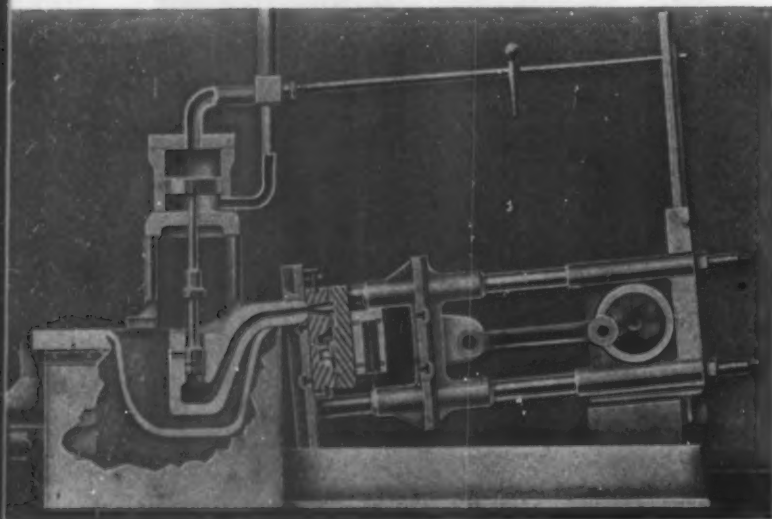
Above—Hot-chamber die casting machine sectioned to show method of injection
